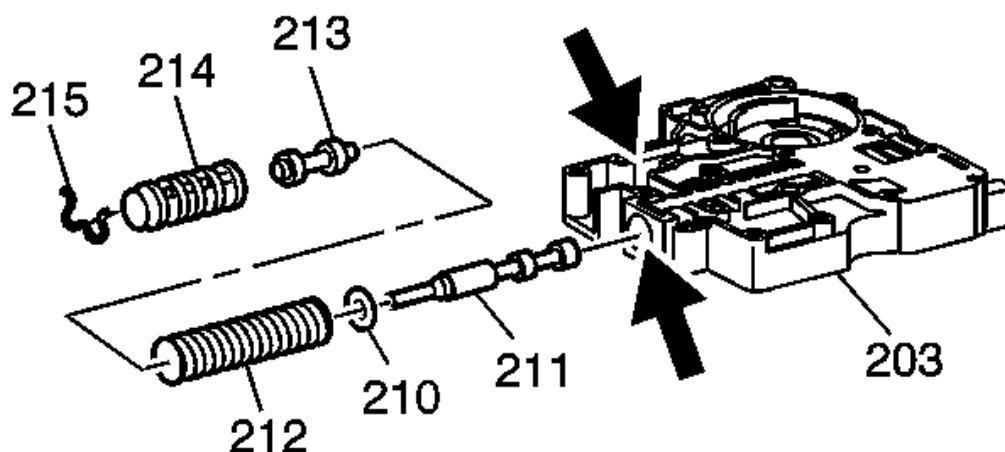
Pressure Regulator Valve Bore Inspection Areas
